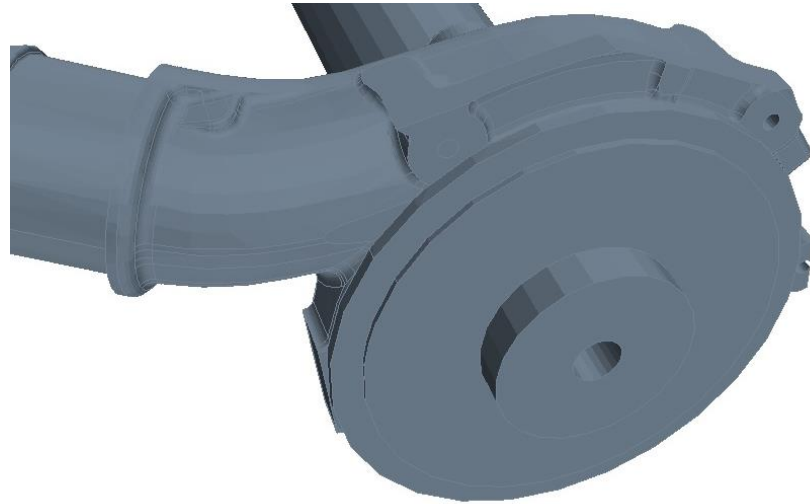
A view on the compressor back-plate and bearing housing of the CHT model
